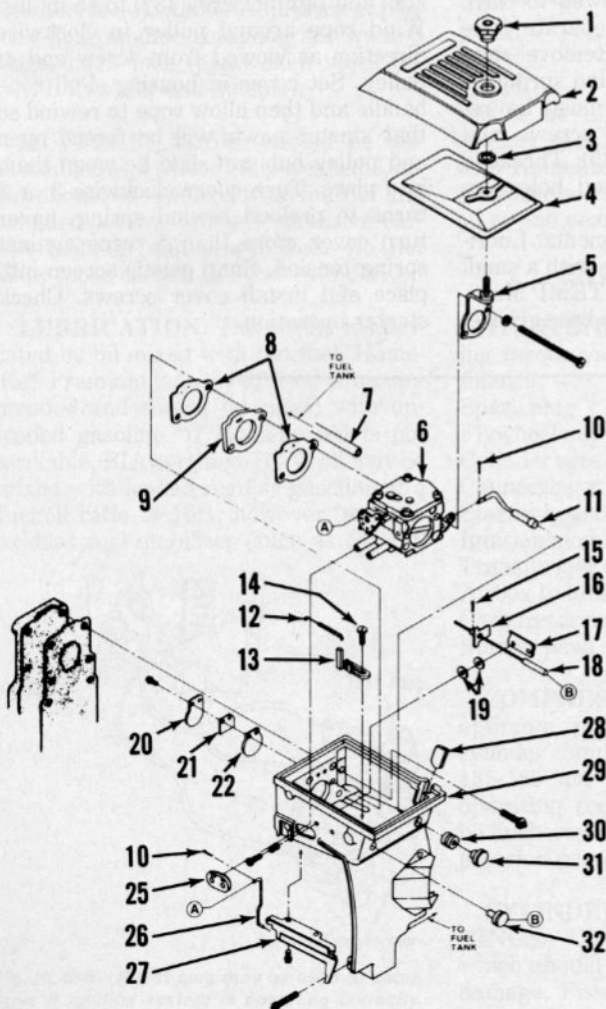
Exploded view of air box assembly on Model XL-12 engine.
